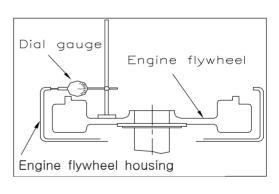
FLYWHELL HOUSING FLATNESS CHECKING
